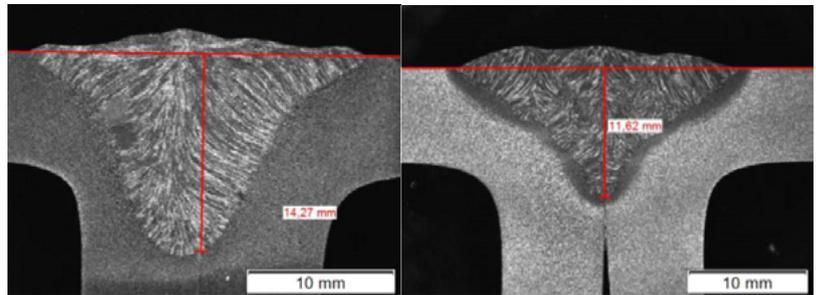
Comparison of flare welds in accordance with ISO 2553; multi-run MAG weld (a); single-run D-arc weld
